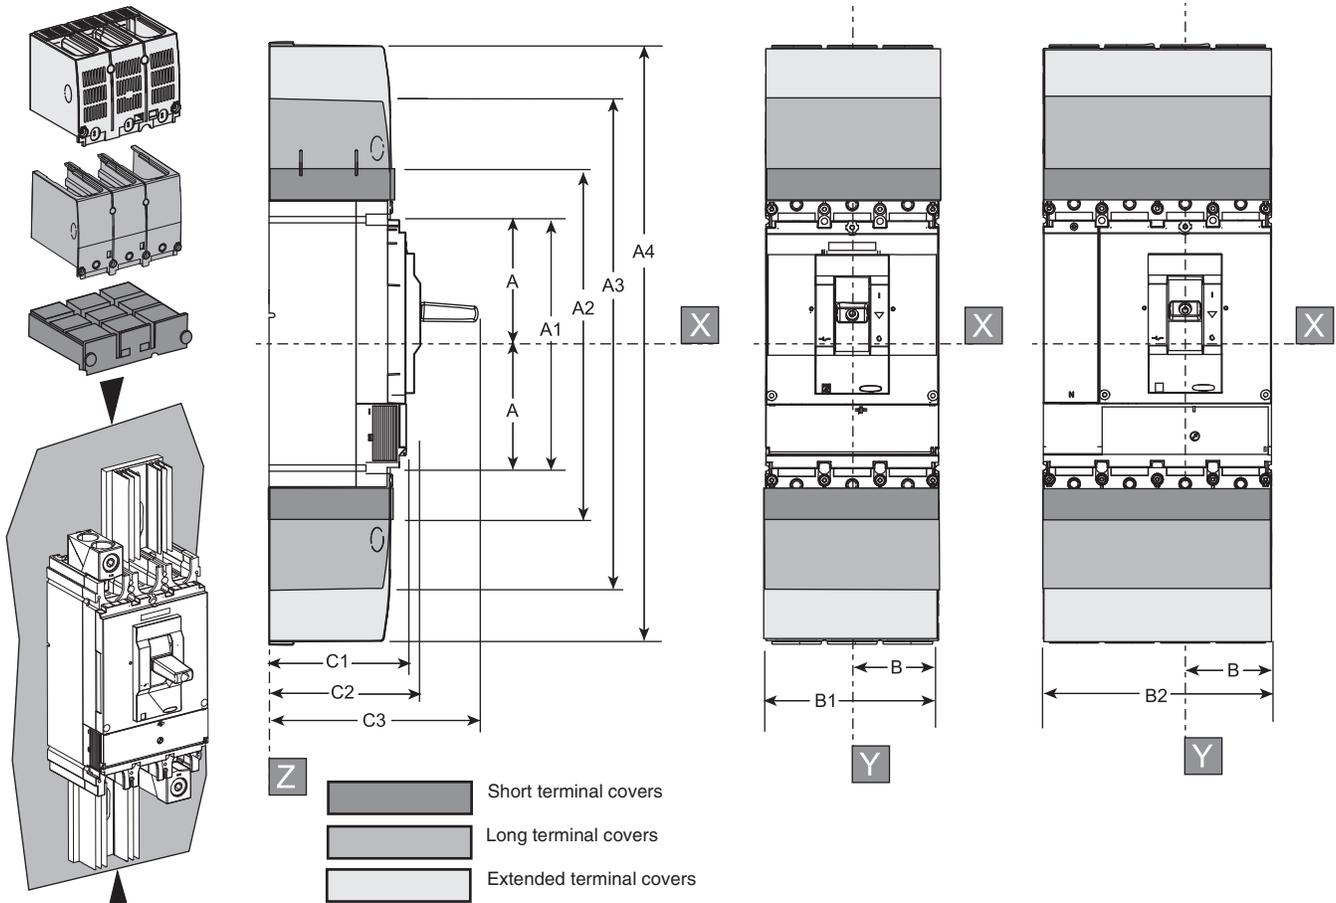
PowerPact T-Frame Fixed Circuit Breaker Panel Cutouts
